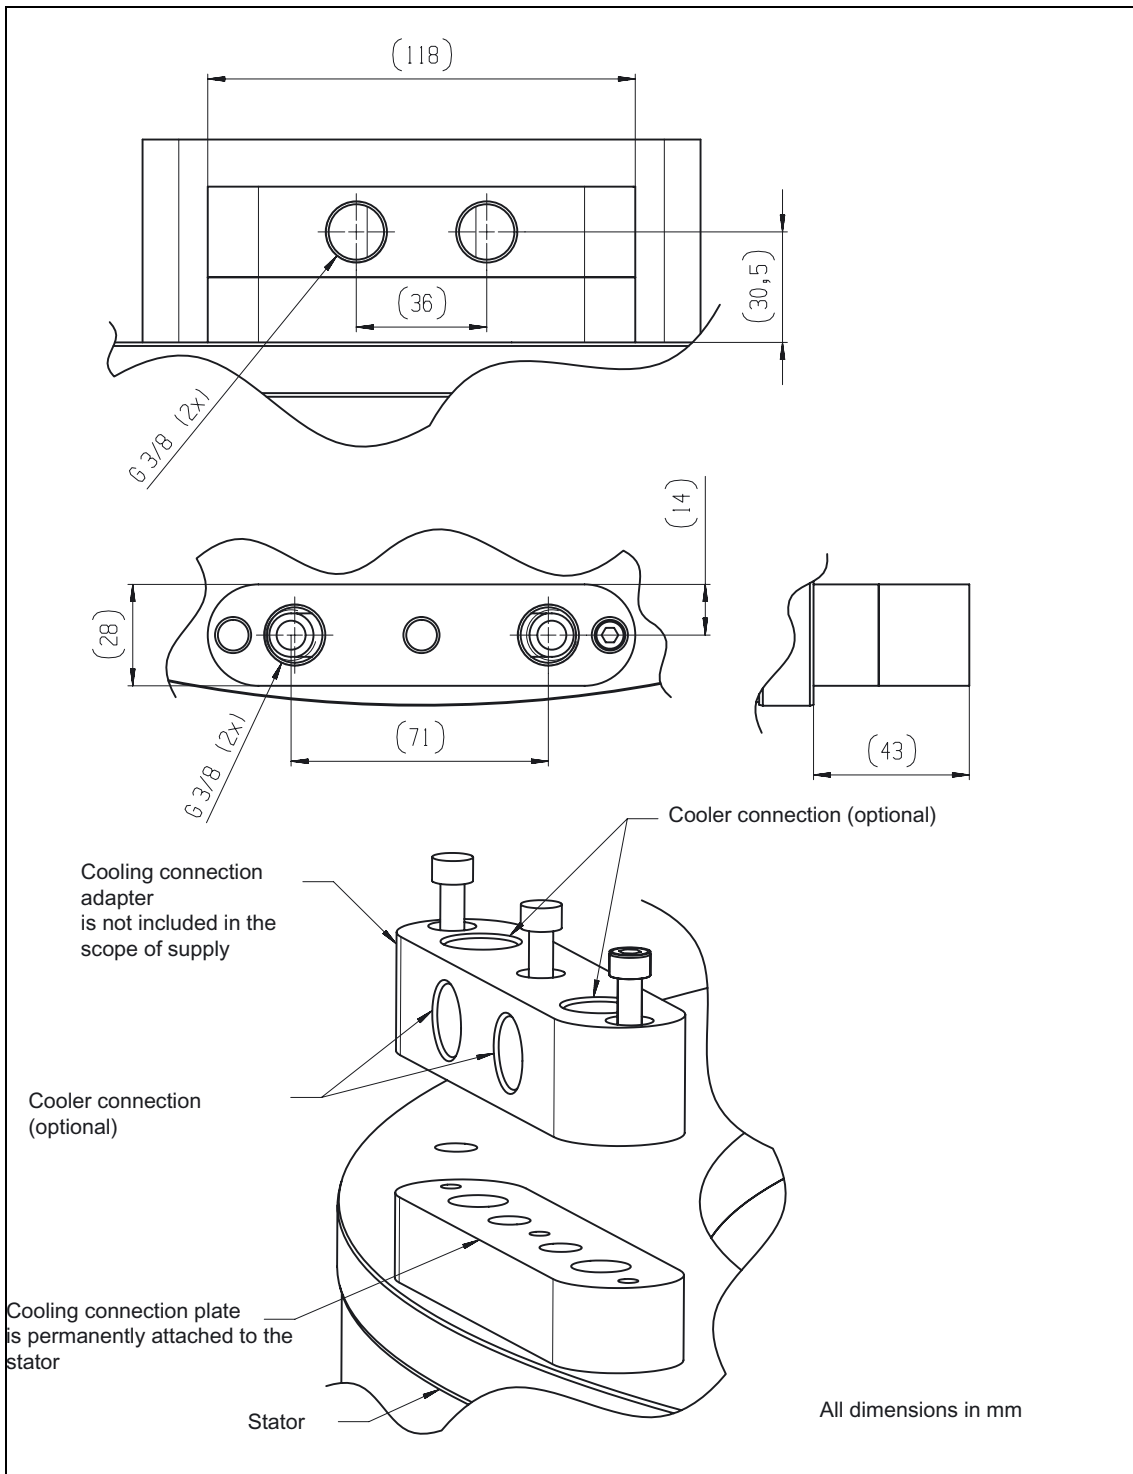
Mounting the cooling connection adapter 1FW6290
